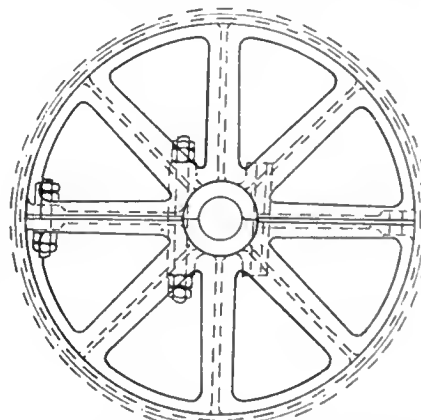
SPLIT GEAR WHEEL SHOWING BOLTS PASSING THROUGH WEB OF ARMS.
